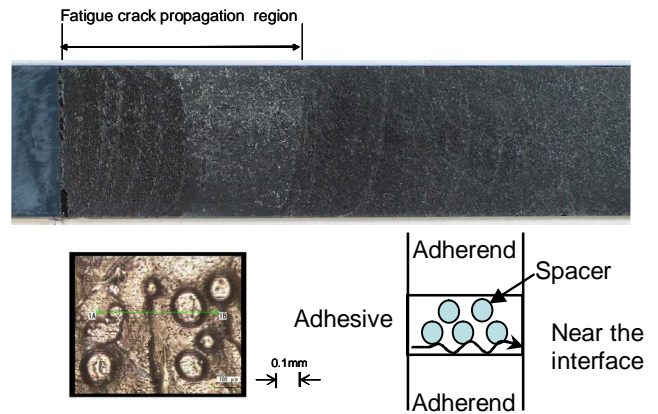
Fracture surfaces of CFRP/CFRP joint with 2mm thick CFRP plate.
